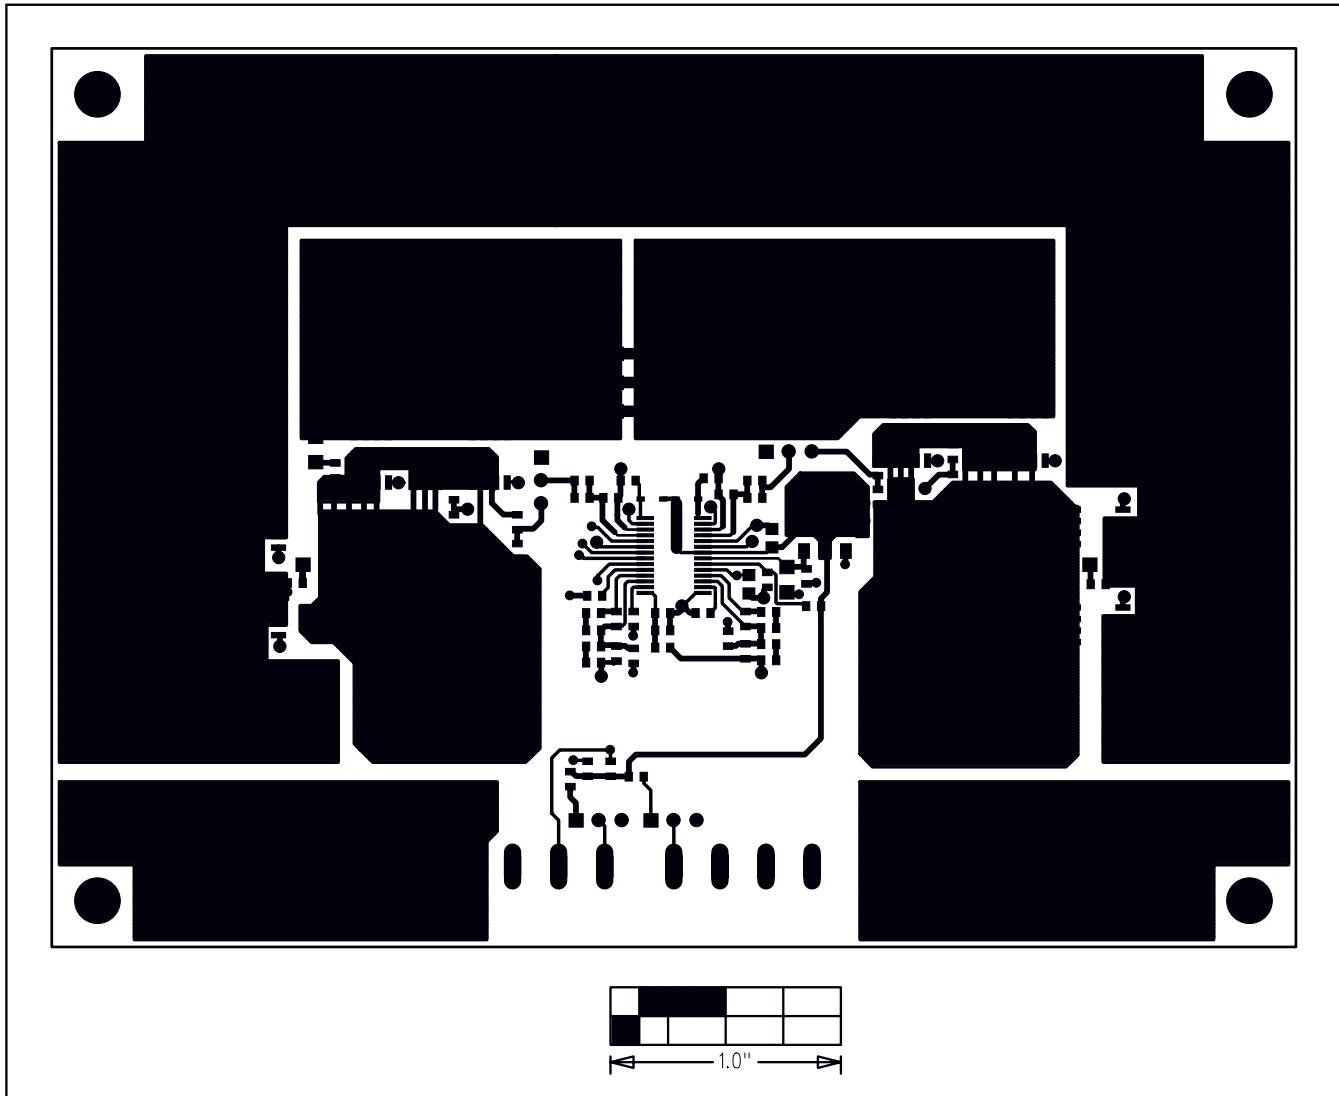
MAX8537 EV Kit PC Board Layout—Component Side
